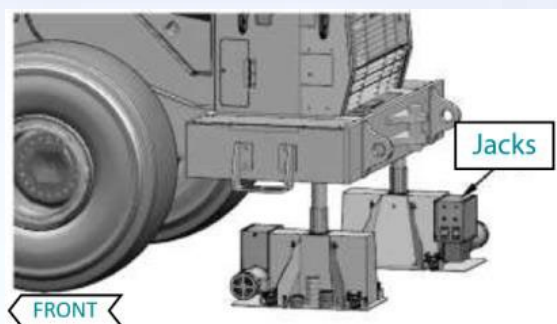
Applying Lift 'n' Lock jack to jack the machine's rear.
